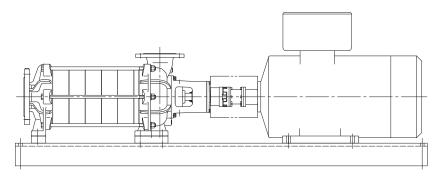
Expansion stage A, pump coupled to motor, mounted on base plate, with coupling guard
